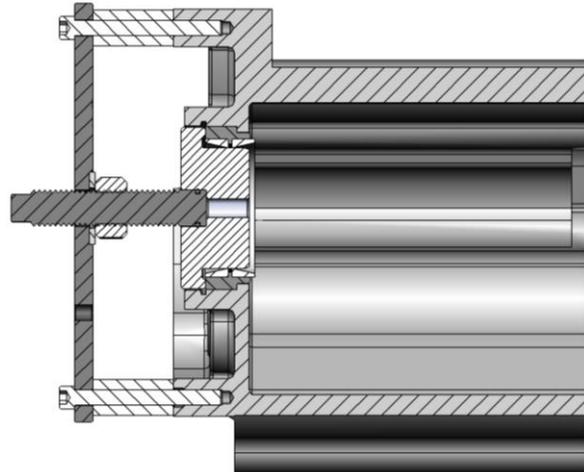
| TAPERED BEARING ADAPTER FULLY SEATED IN CASE
